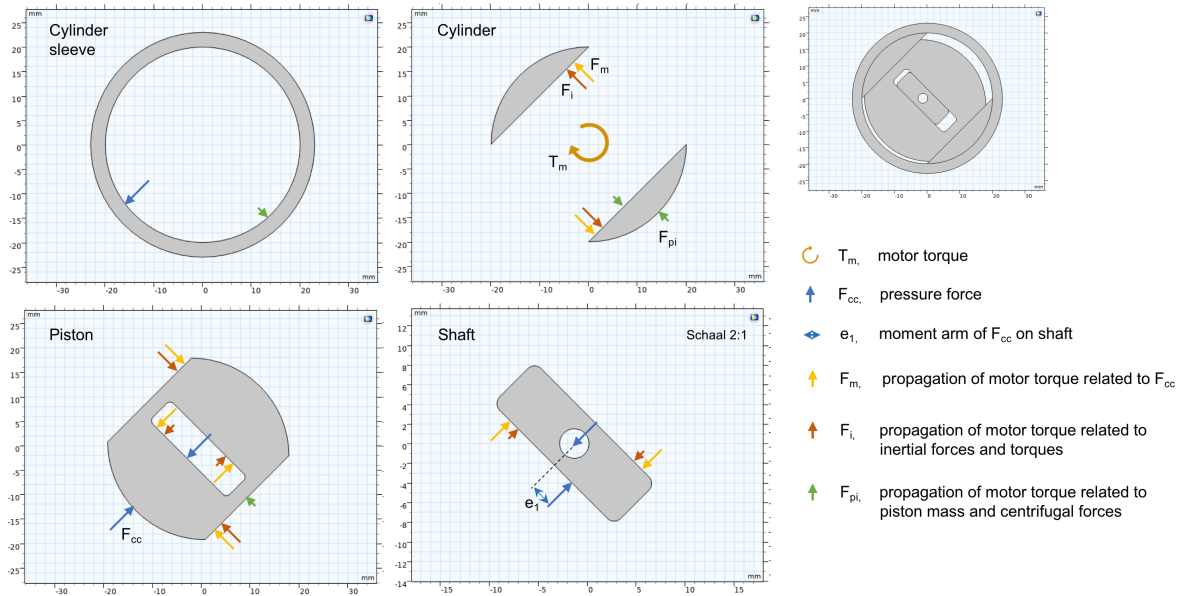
Schematic overview of the forces on the bearing surface of a cylinder-actuated system.
